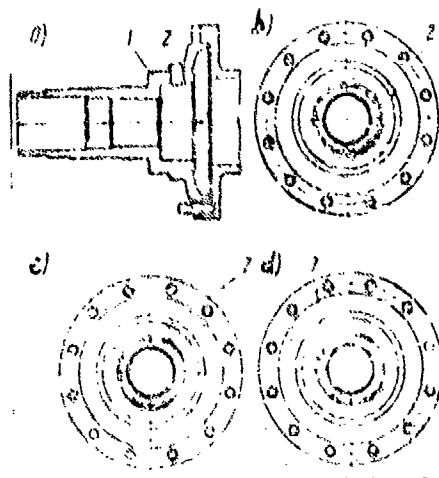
Diagram of location of the holes in the spindle for air supply to the drive axle tires of the ZIL-131 motor vehicle
